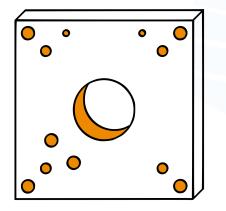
The stator receiver plate is manufactured on a lathe
